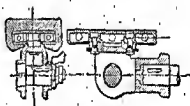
Marine-engine and Locomotive Type of Crosshead.
